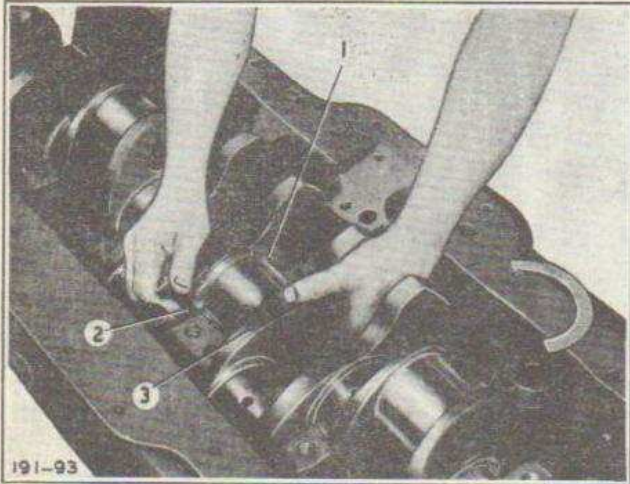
View Showing Removal of Upper Halves of Thrust Washers
